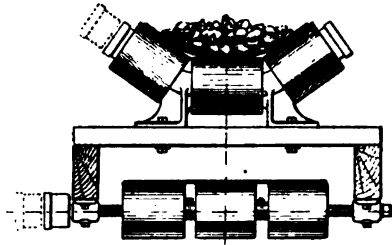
A. Support for Band Conveyor of the Robins Conveying Belt Co.
